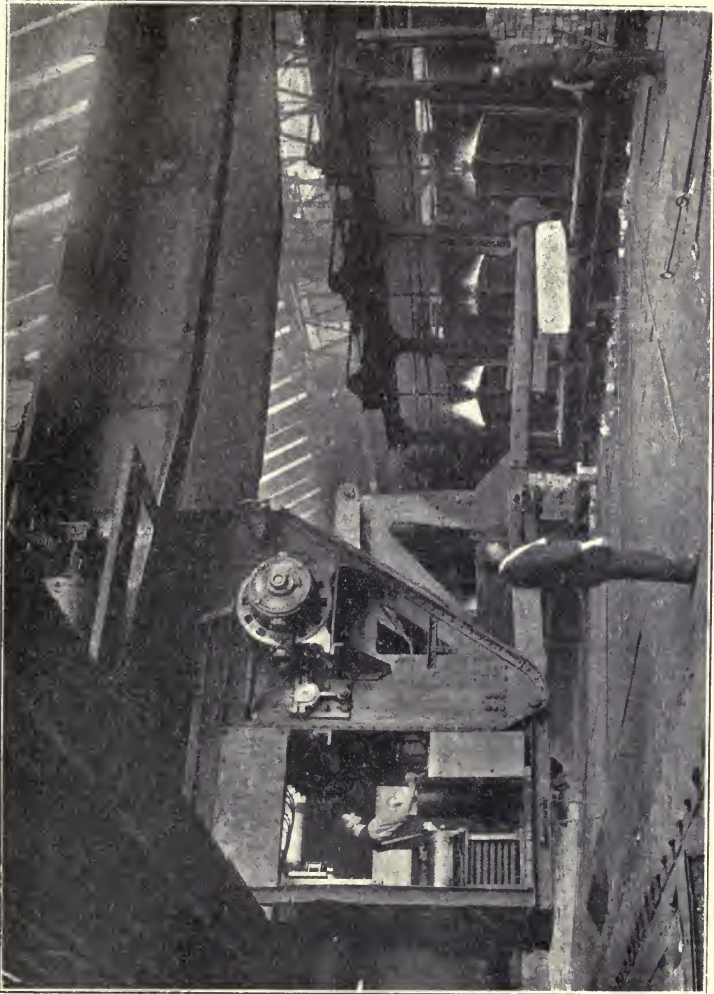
Wellman Slab Charging Machine supported on Overhead Girder.
